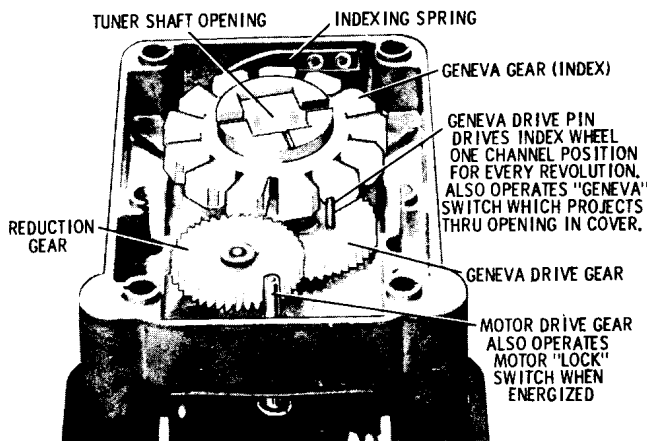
GENEVA DRIVE SYSTEM (GEAR BOX)
